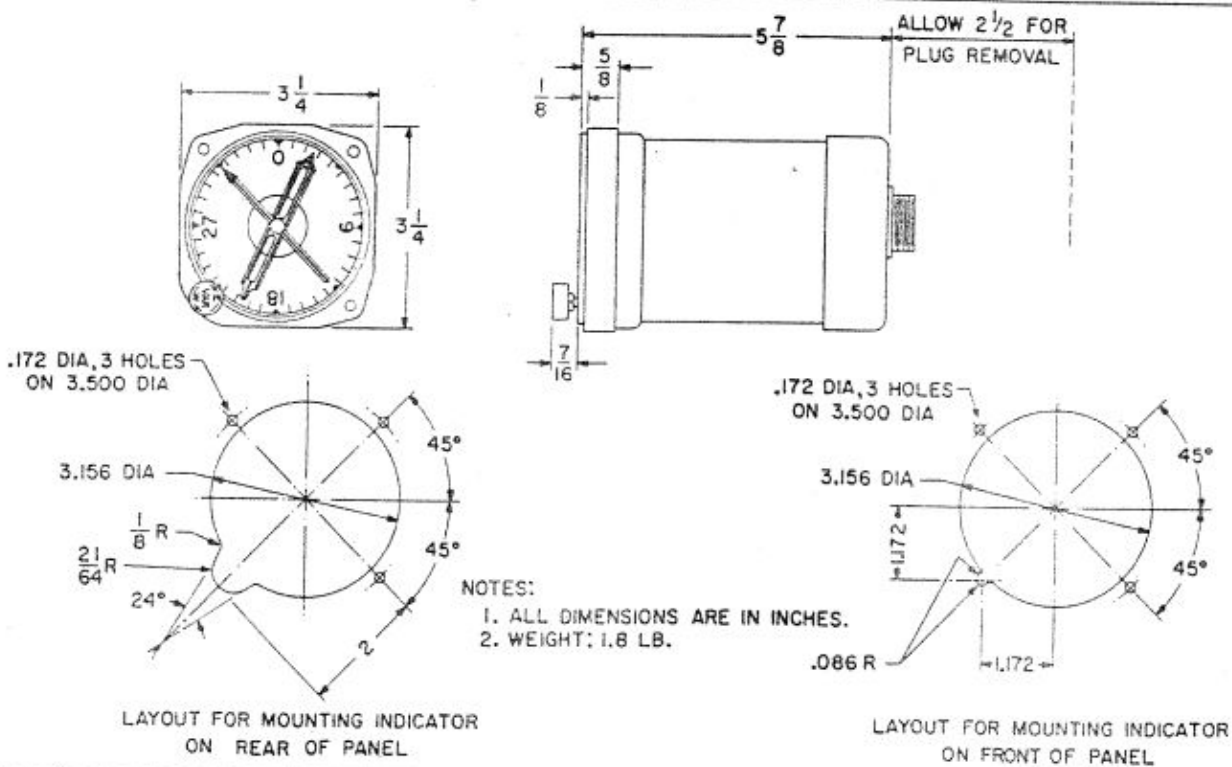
ARC Type IN-13 and IN-13A Indicators, Outline Dimensions
